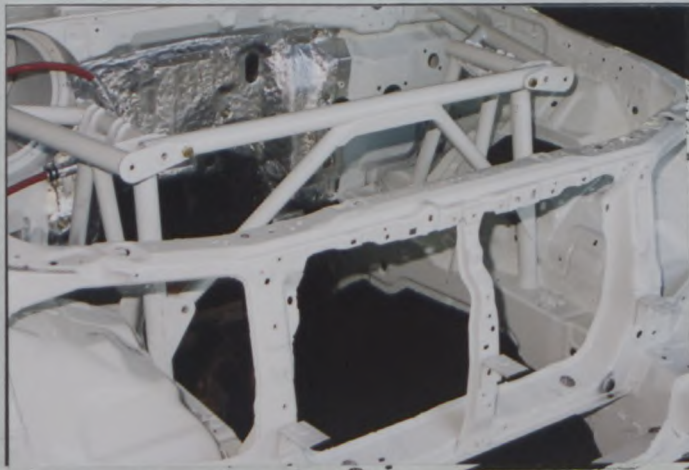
FRONT HOOP TO BULKHEAD
